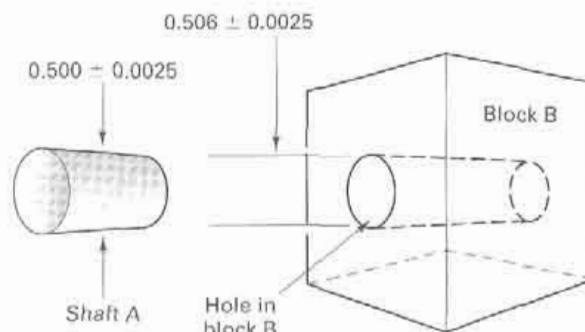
When mating parts are designed, each shaft must be smaller than each hole for a clearance fit.
